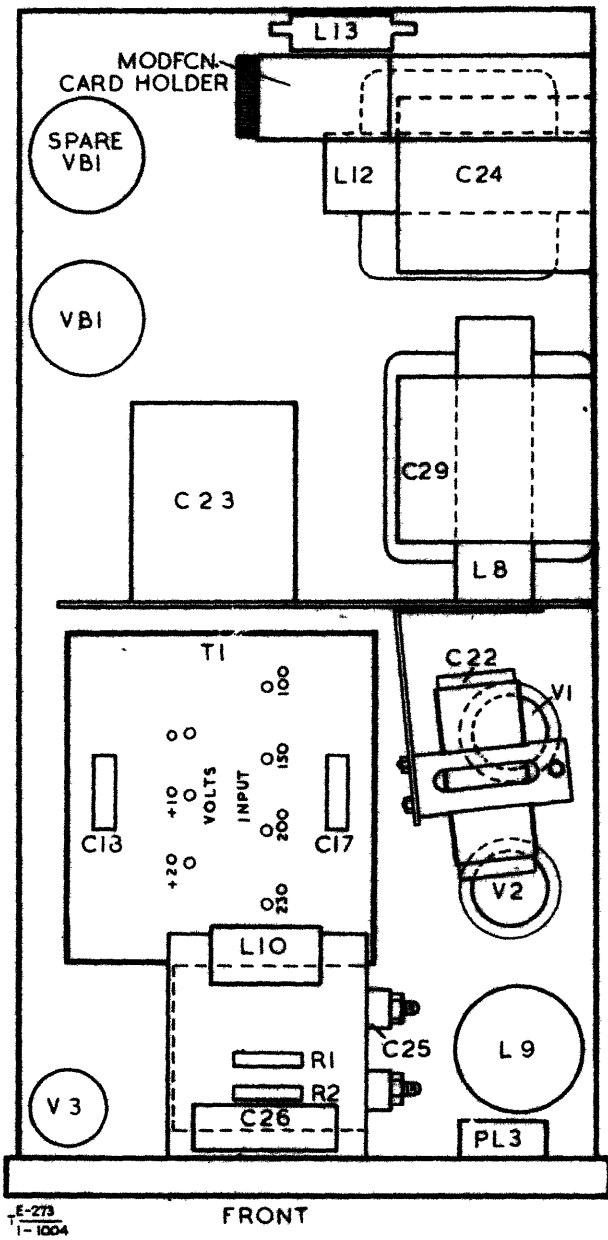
P.S.U. No. 33 <sup>ABOVE</sup> ~~below~~ chassis component layout
